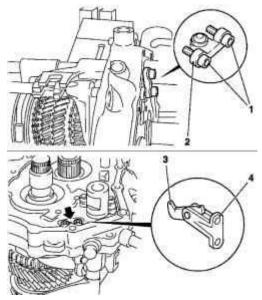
Installation of the bridge: 1 - clamping bolts 2 - Bridge 3 - Latch, 4 - bearing bearing
